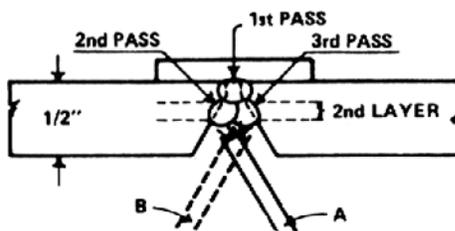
Multilayer Deposit - Overhead Butt Weld
